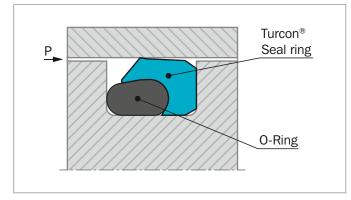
Turcon® VL Seal® mounted in O-Ring groove
